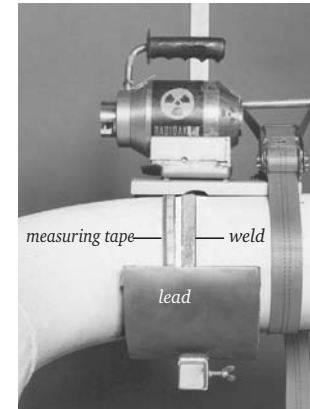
5. Gamma container with collimator on a circumferential weld in a pipe
